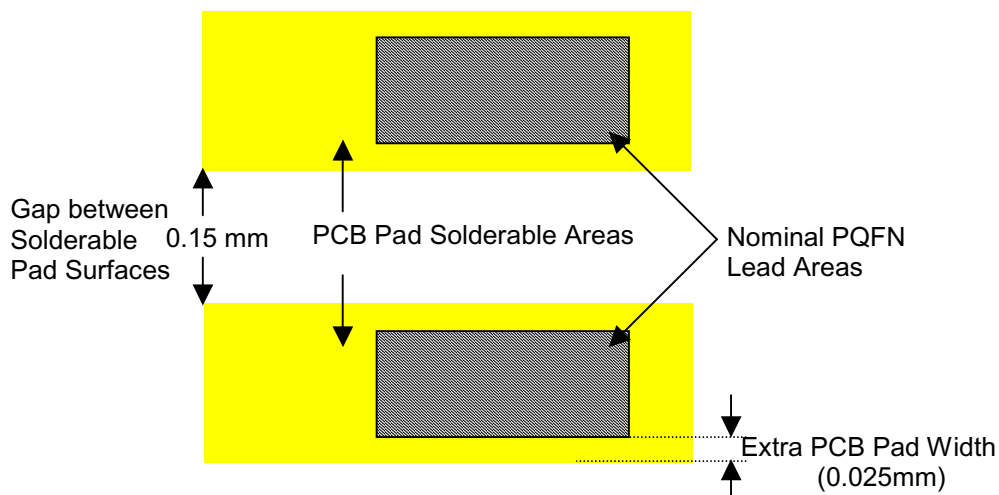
A Cross-Section of Package Lead and Suggested PCB Pad
